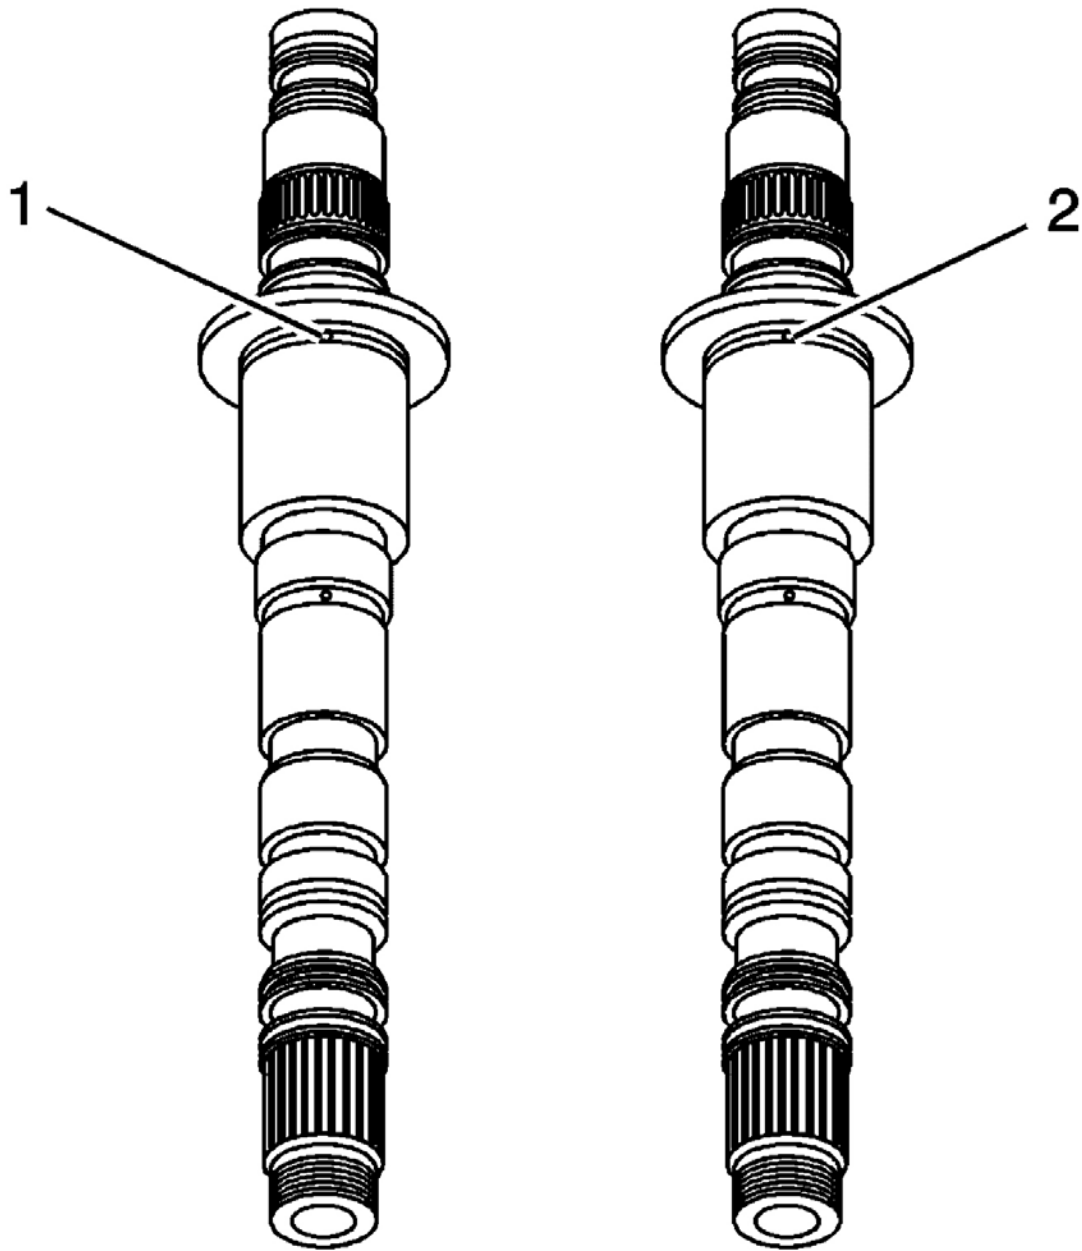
Inspecting The 1st/2nd Clutch Shaft
